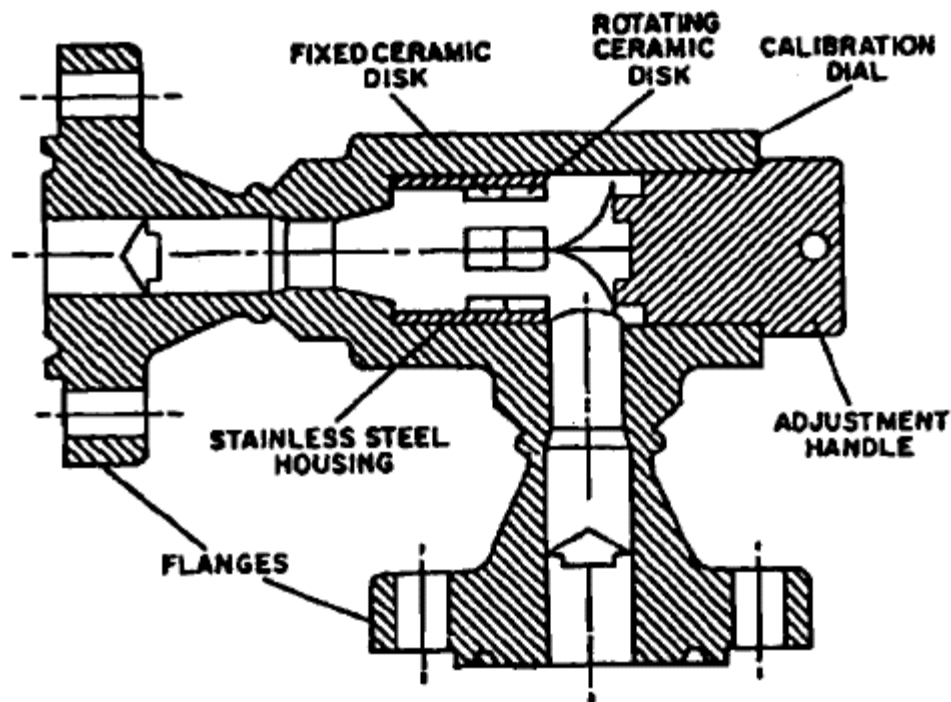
Multiple orifice valve wellhead choke design (after Willis Oil Tool Co.<sup>2</sup>).
